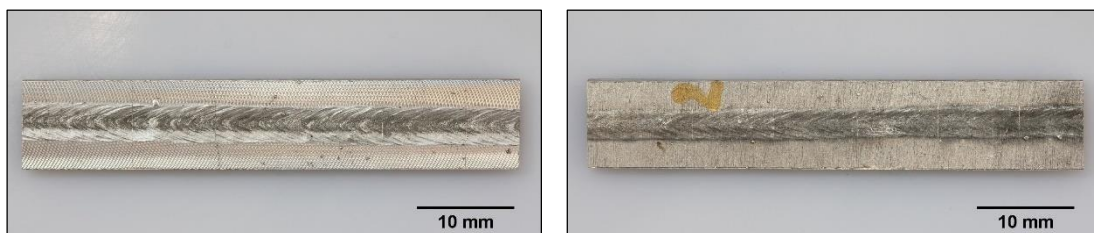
Appearance of the weld bead: left – surface, right – root
